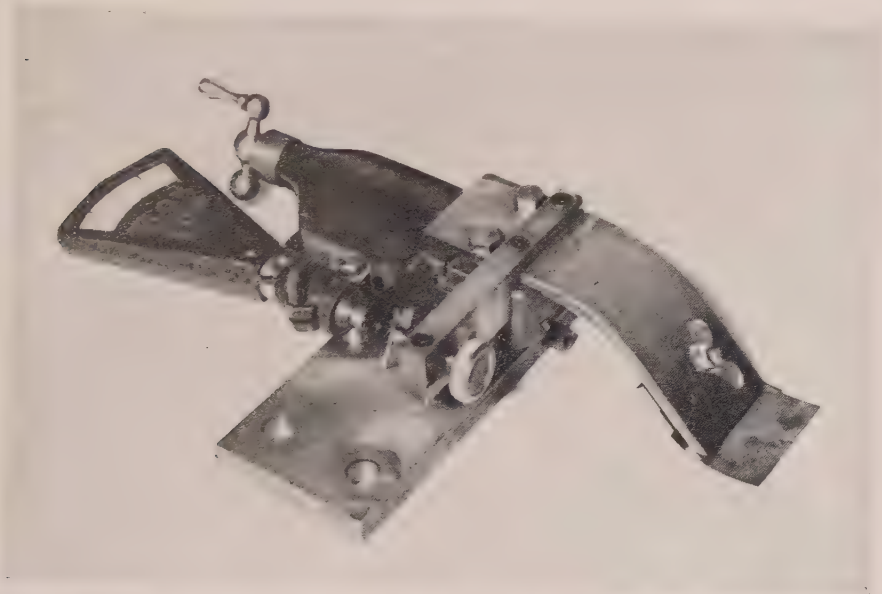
Guillotine attachment used in cutting specimens from rolled strip.
